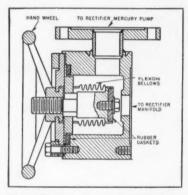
Cross section view of the bellows type vacuum valve used between the rectifier and the pump.
